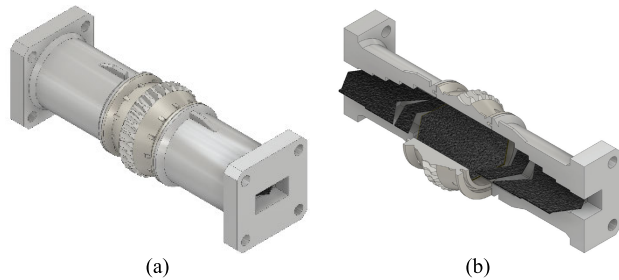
CAD renderings for the three-section waveguide assembly of the rotary vane attenuator, representing a solid silver outer structure (shown in light grey): (a) complete assembly; and (b) cross-section showing absorbers (conductive PLA, shown in black) in the fixed transitions and the rotating center section.
